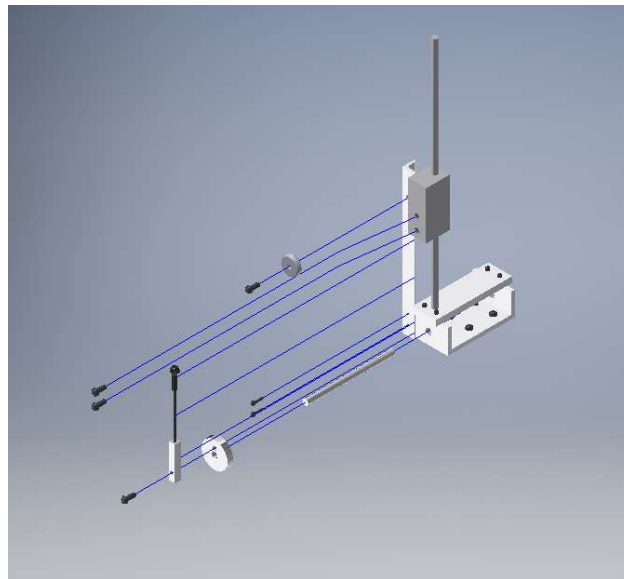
Motion Mechanism exploded view assembly being worked.
